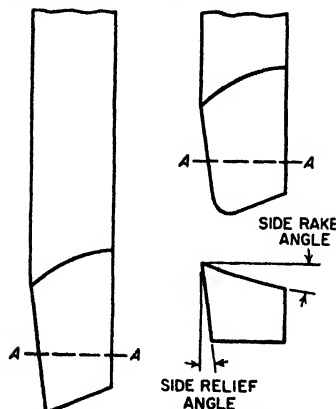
Rake angle and side relief angle on shaper tools. A-A are cross sections of the tools.
